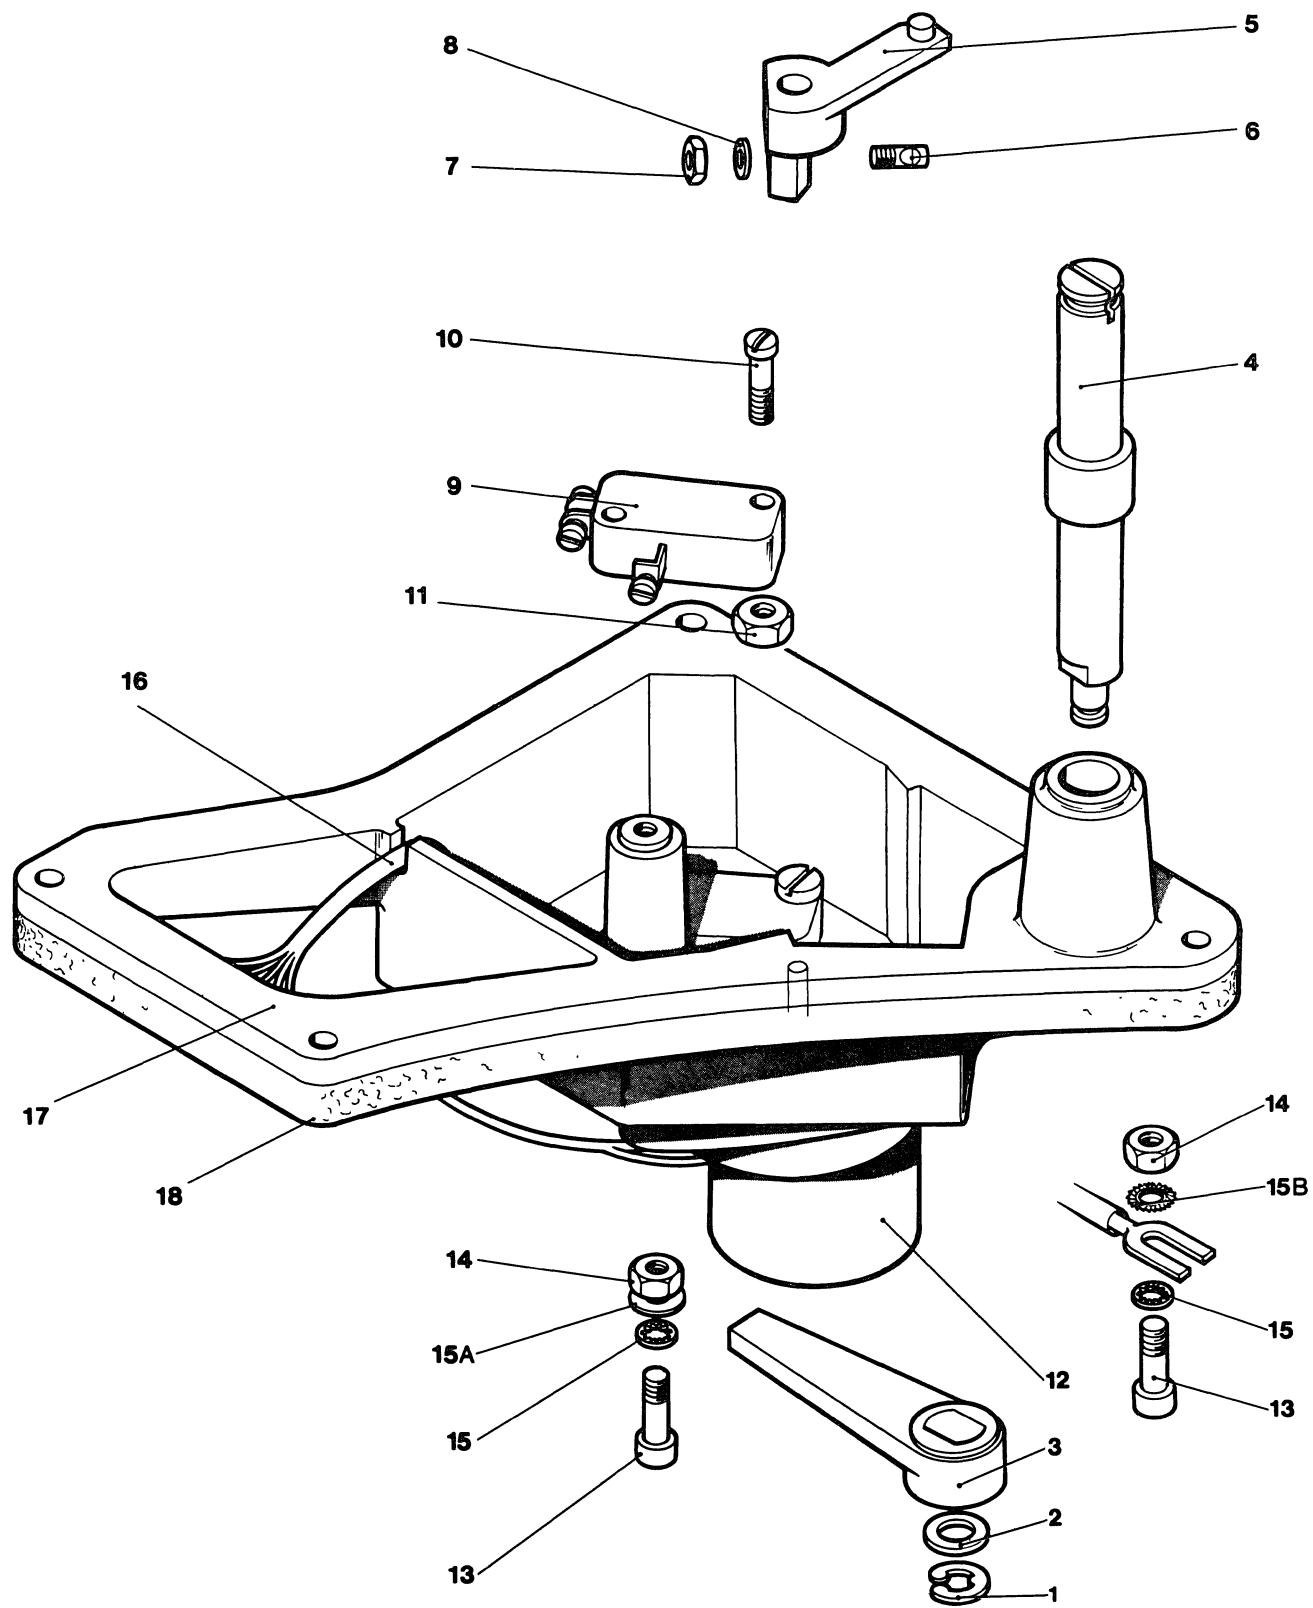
BRUSH DRIVE ASSEMBLY - 50HZ
